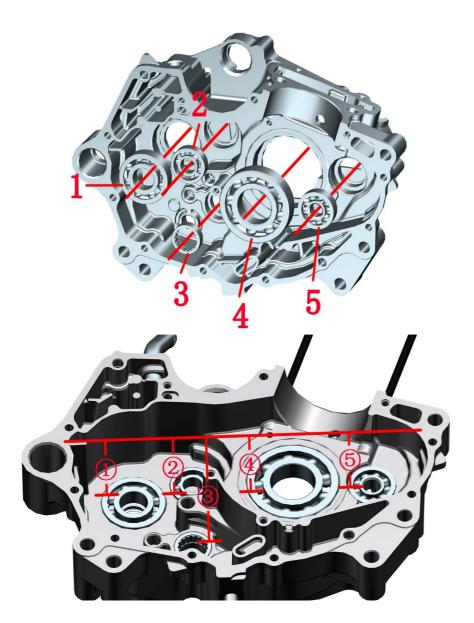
LEFT CRANKCASE		ZT158MJ Left crankshaft box assembly-6	CHK	Q
